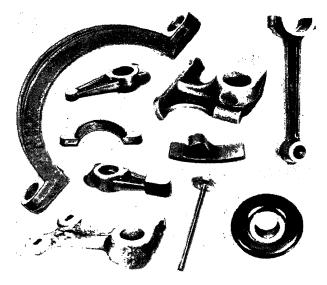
Parts brought to dimension by coining. (National Machinery Co.) Figures 44 to 47 show more detailed views of the same type of operation.
